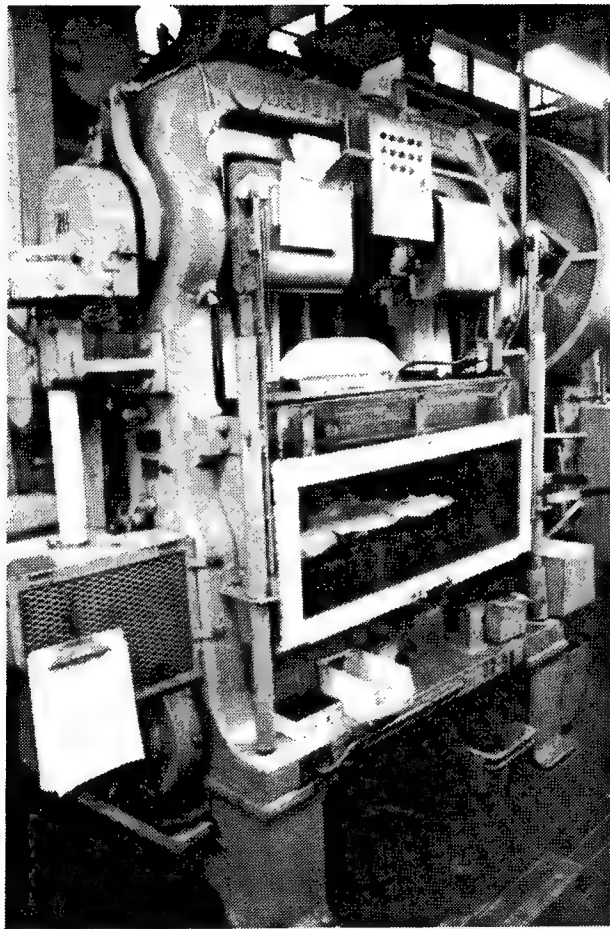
Building 2: Bullet Assembly Machine manufactured by Waterbury-Farrel.
